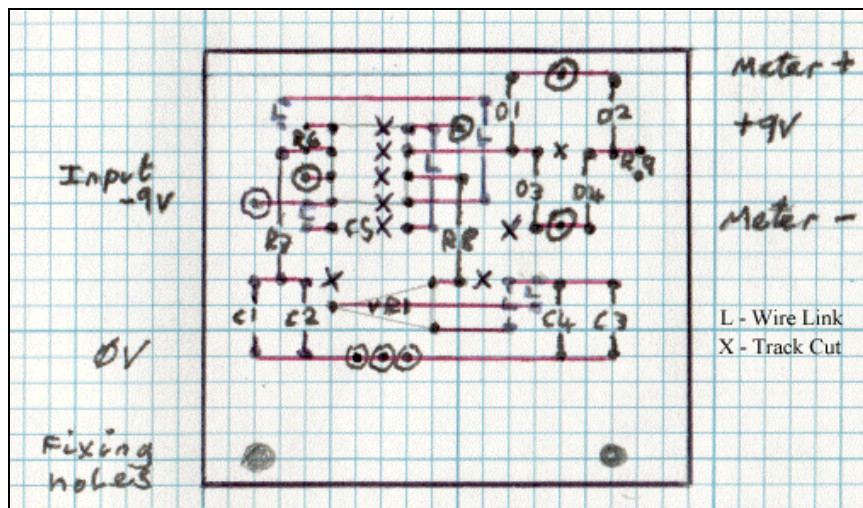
Veroboard layout for primary gain stage and meter drive stage
